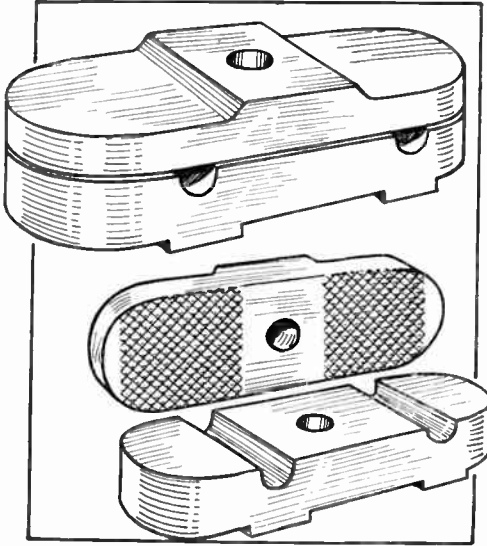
A SINGLE-HOLE FIXING PORCELAIN CLEAT
